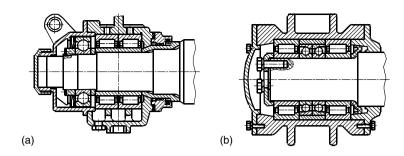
Use of spherical bearings: (a) triple bearing of Japanese high-speed trains; (b) triple bearing of French high-speed trains.
